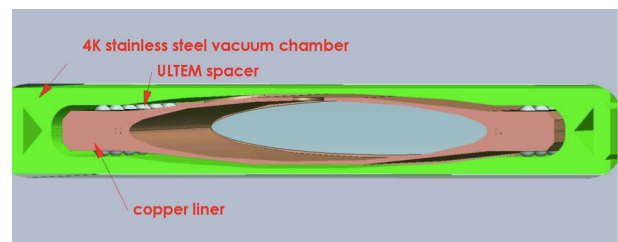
Cross section of the wiggler vacuum chamber and the copper liner.
